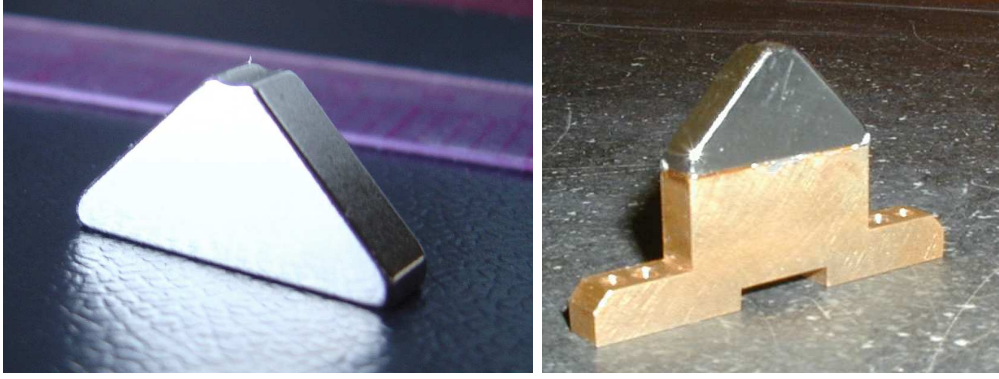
Single "Delta" shape magnetic block (left), the block soldered to copper holder(right).
